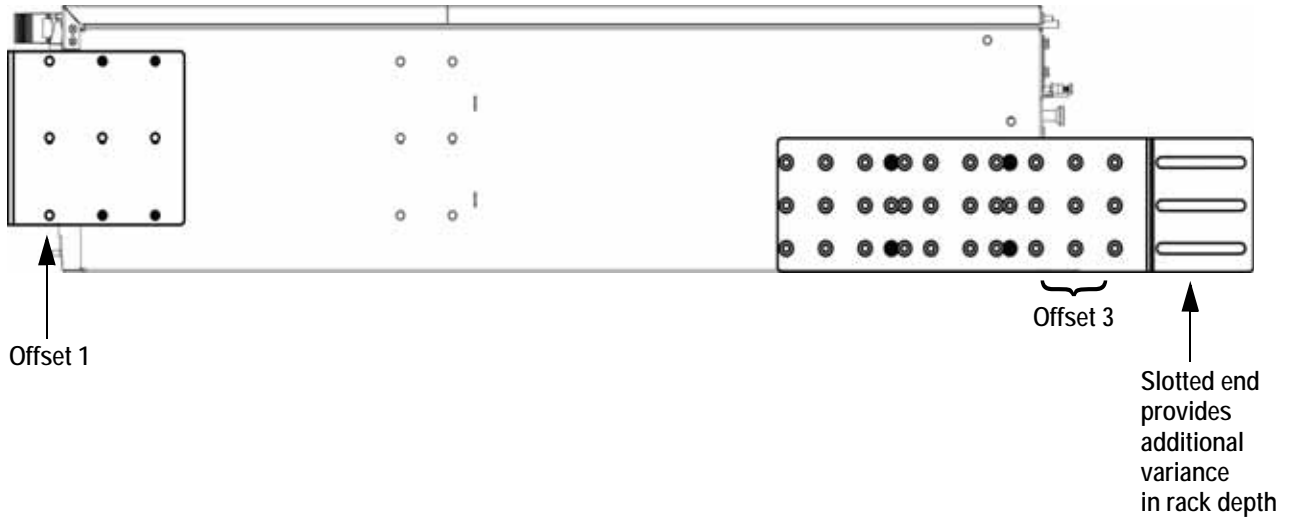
Bracket Mounting for 33" to 34.5" Rack
